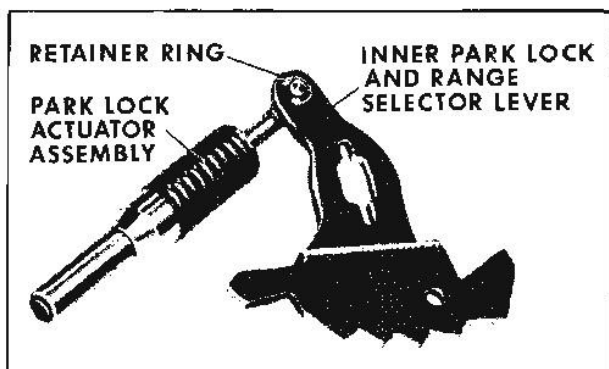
B-69 Park Lock Actuator and Range Selector Lever Assembly
